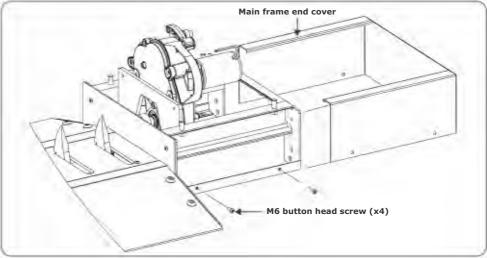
FIT THE MAIN FRAME END COVER - INDEPENDENT DRIVE
